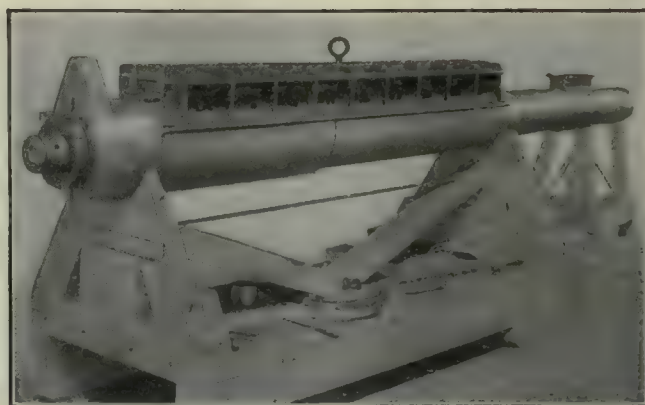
SLEIGH GAGE FOR CHECKING SURFACES OF THE SLIDE GUIDES
